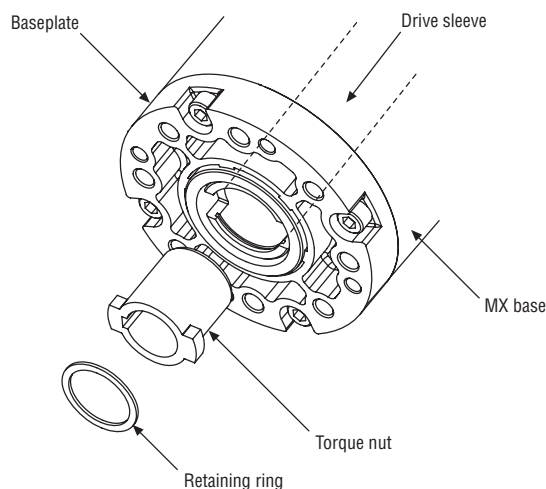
Exploded view of B4/B4E base (MX-05 shown)
